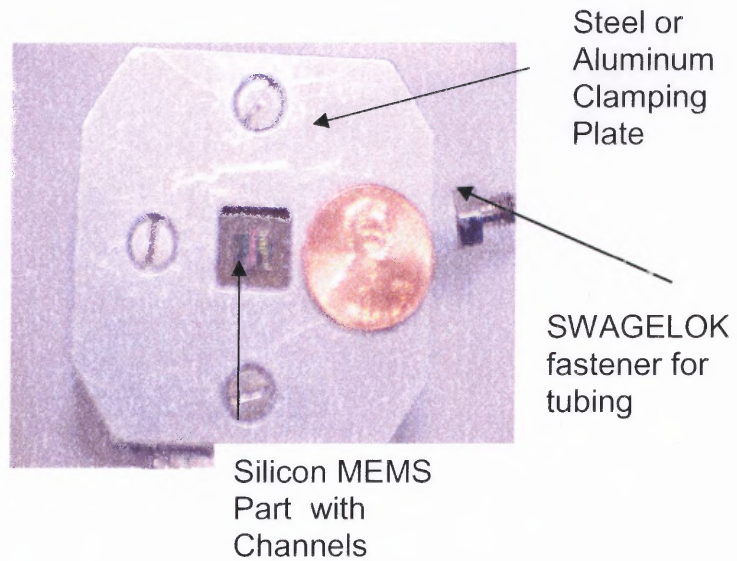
Top View of Manifold Assembly – Final Assembly.
